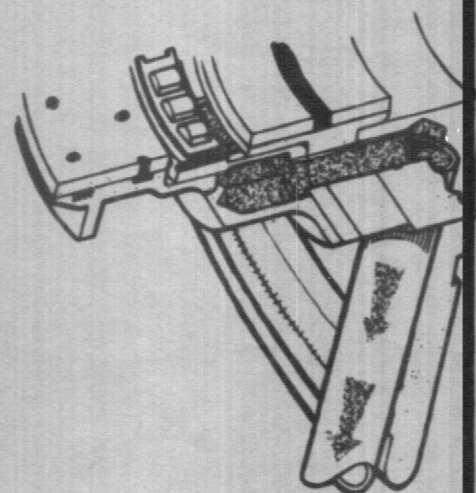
COMPRESSOR SHAFT SEALING AND COOLING AIR
